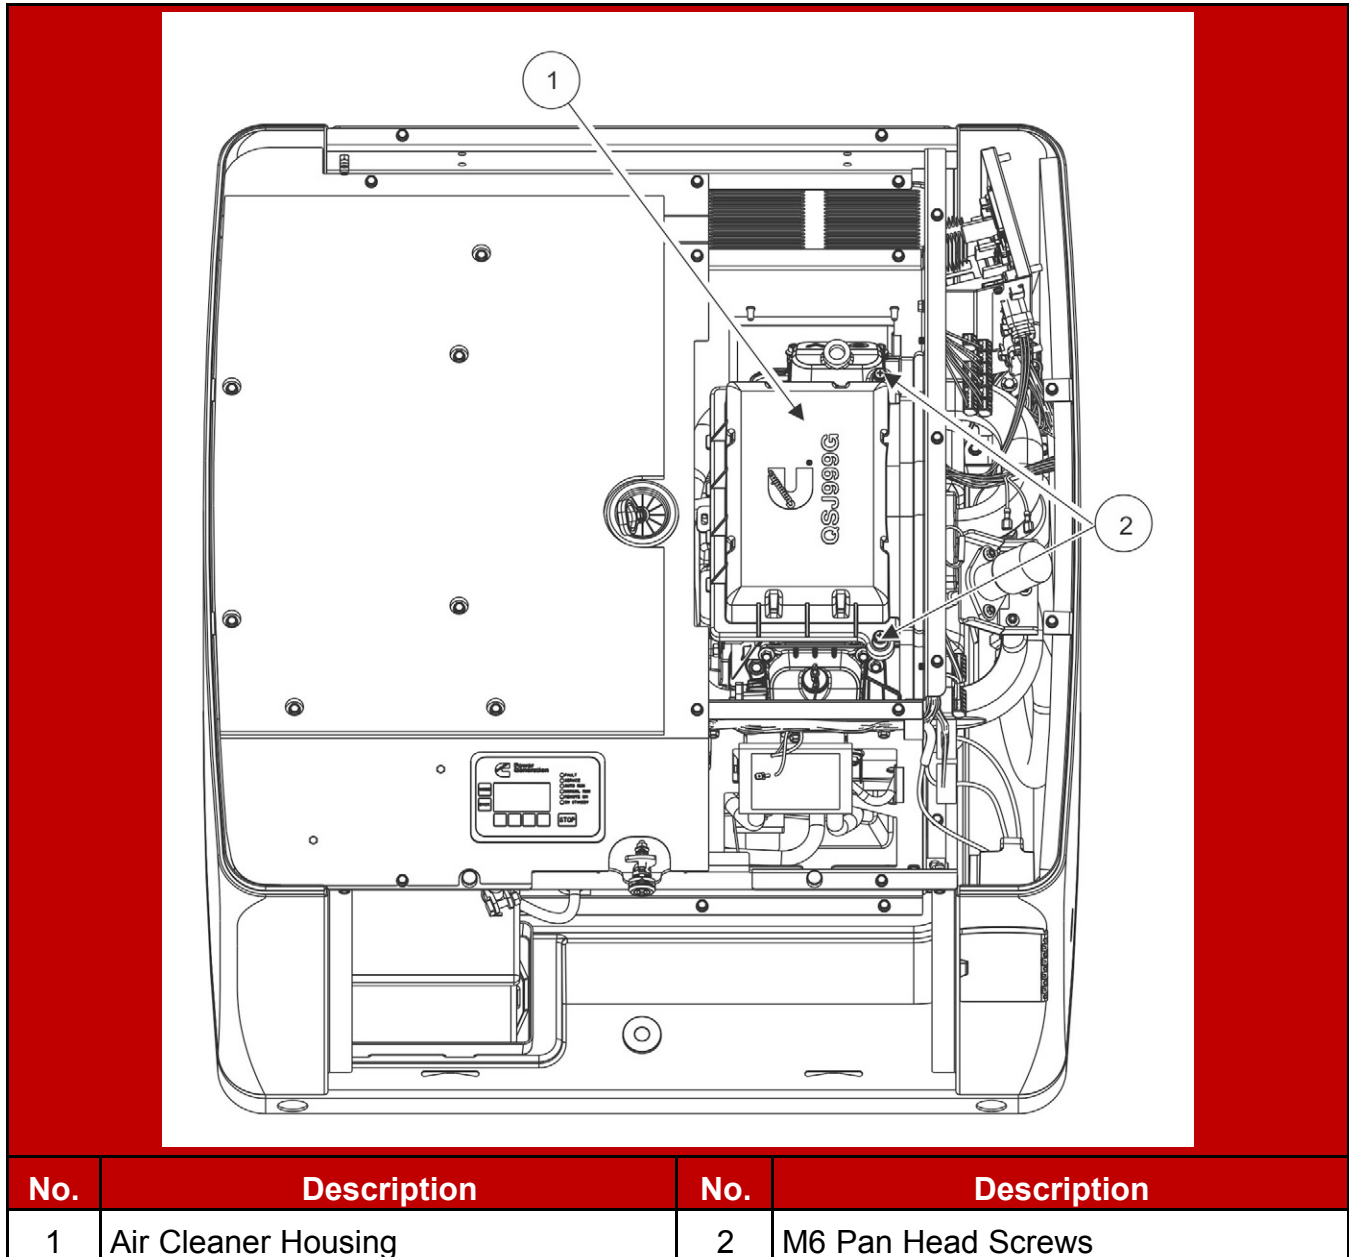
AIR CLEANER ELEMENT WITH PAN HEAD SCREWS
